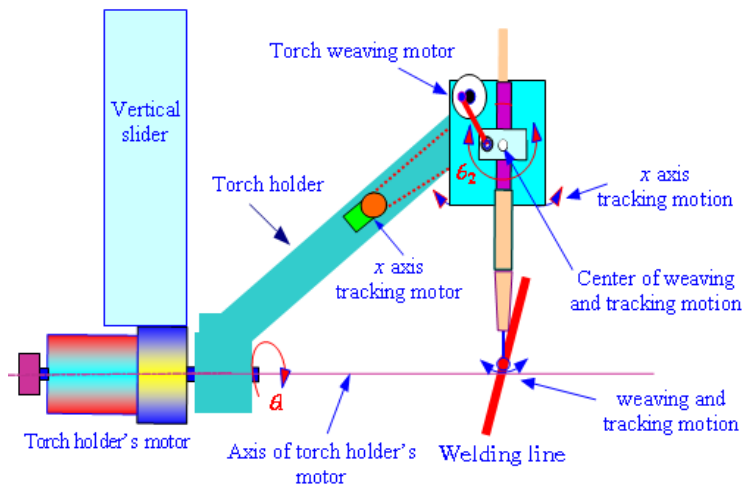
Mechanism of the torch holder and mechanism of the weaving torch
